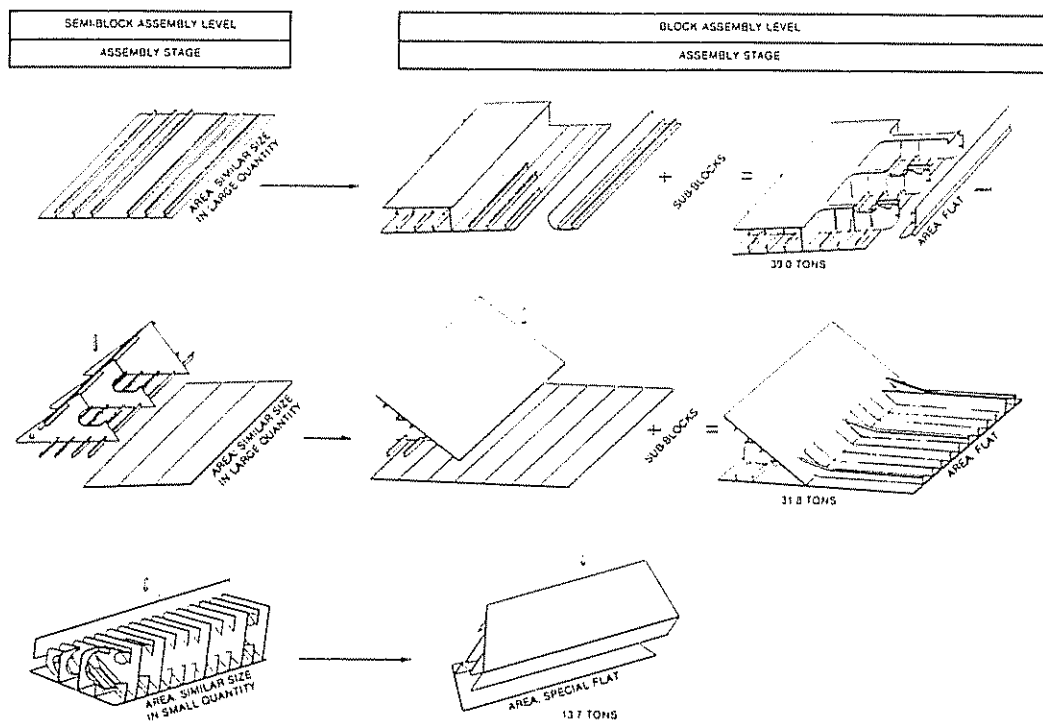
Semi-block and block assembly, showing a bottom wing tank side shell with hopper and the transverse hopper in a cargo hold
